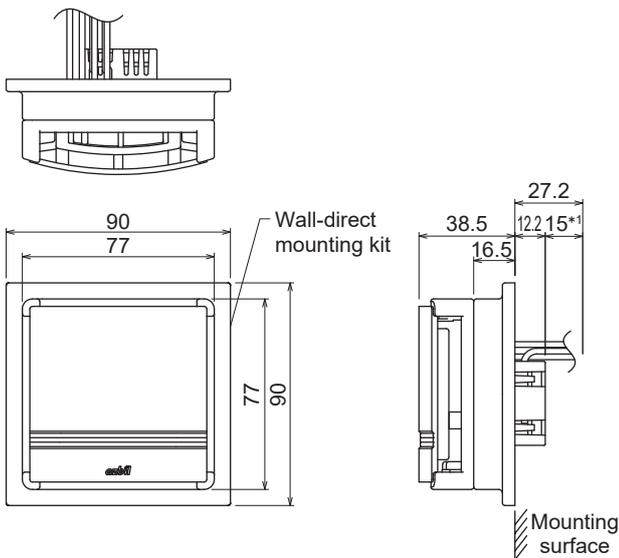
Dimensions when mounted on Wall-direct mounting kit (mm)
